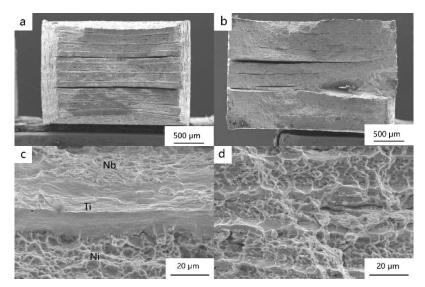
Tensile fracture surfaces of the Ni/Ti/Nb multilayer composite: (a)after the third pass, (b)after the fifth pass, (c)high magnification after the third pass, (d) high magnification after the fifth pass.
